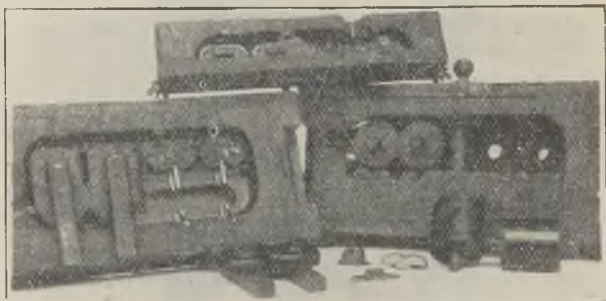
A SET OF CORE-BOXES FOR MAKING A MONOBLOC CYLINDER.
